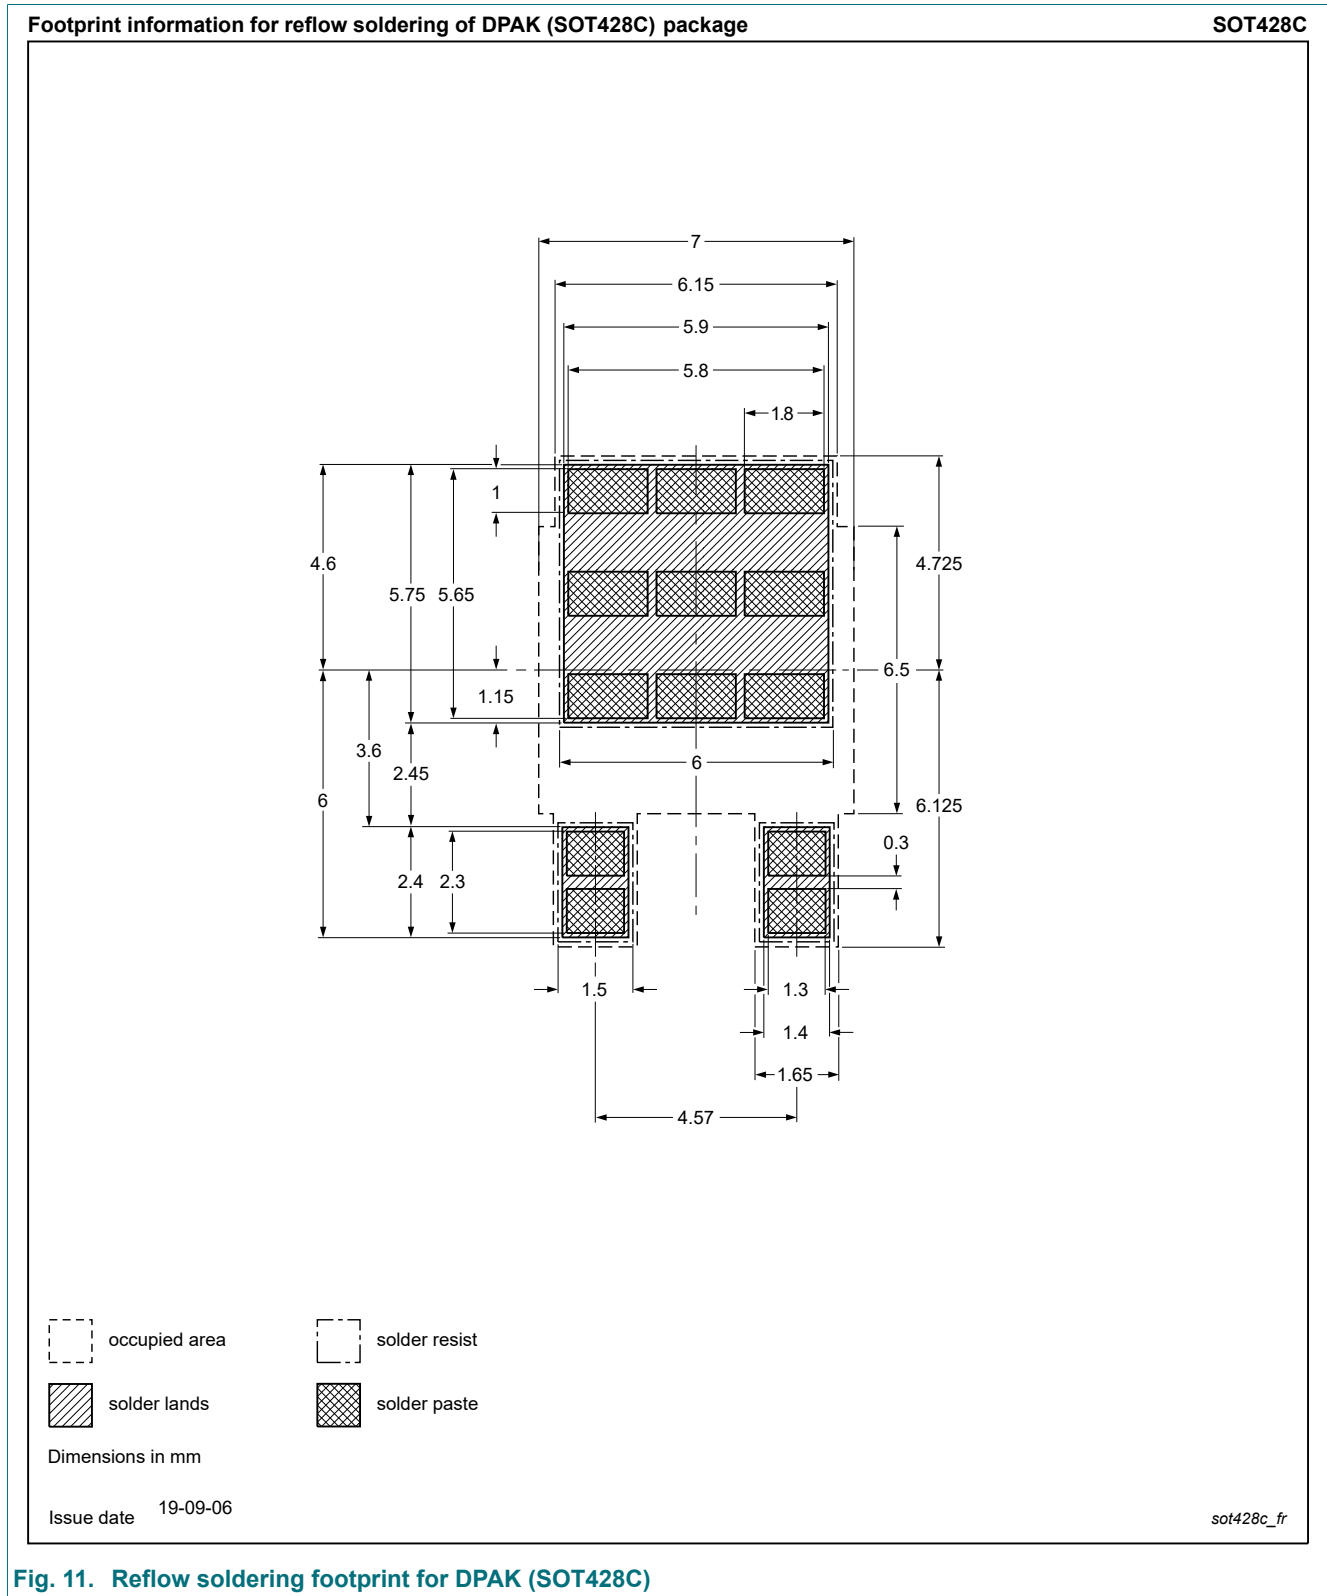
Reflow soldering footprint for DPAK (SOT428C)
